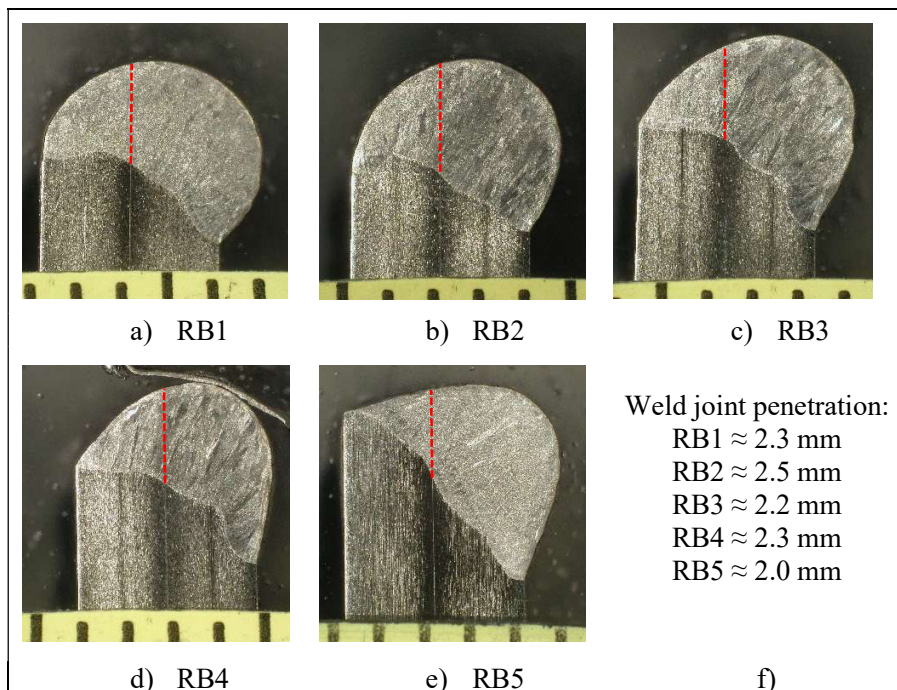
Weld cross-sections from the welded edge joint of test specimen RB. Red dashed line indicates the location from which the weld joint penetration is measured. In the scale strip, one interval corresponds to 1 mm.
